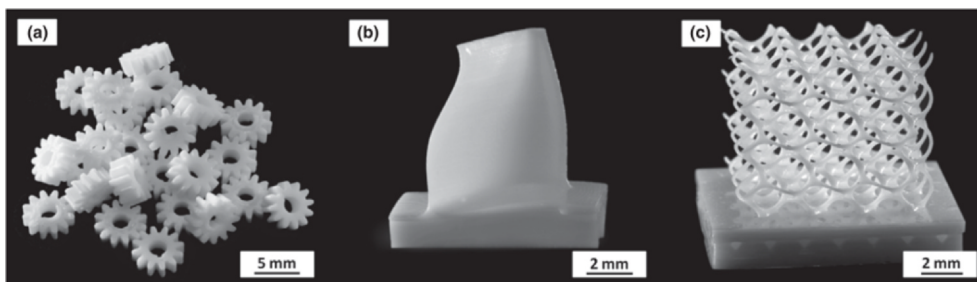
Sintered alumina parts fabricated using the LCM technique: (a) gear wheels; (b) a turbine blade; and (c) a cellular cube [280].
